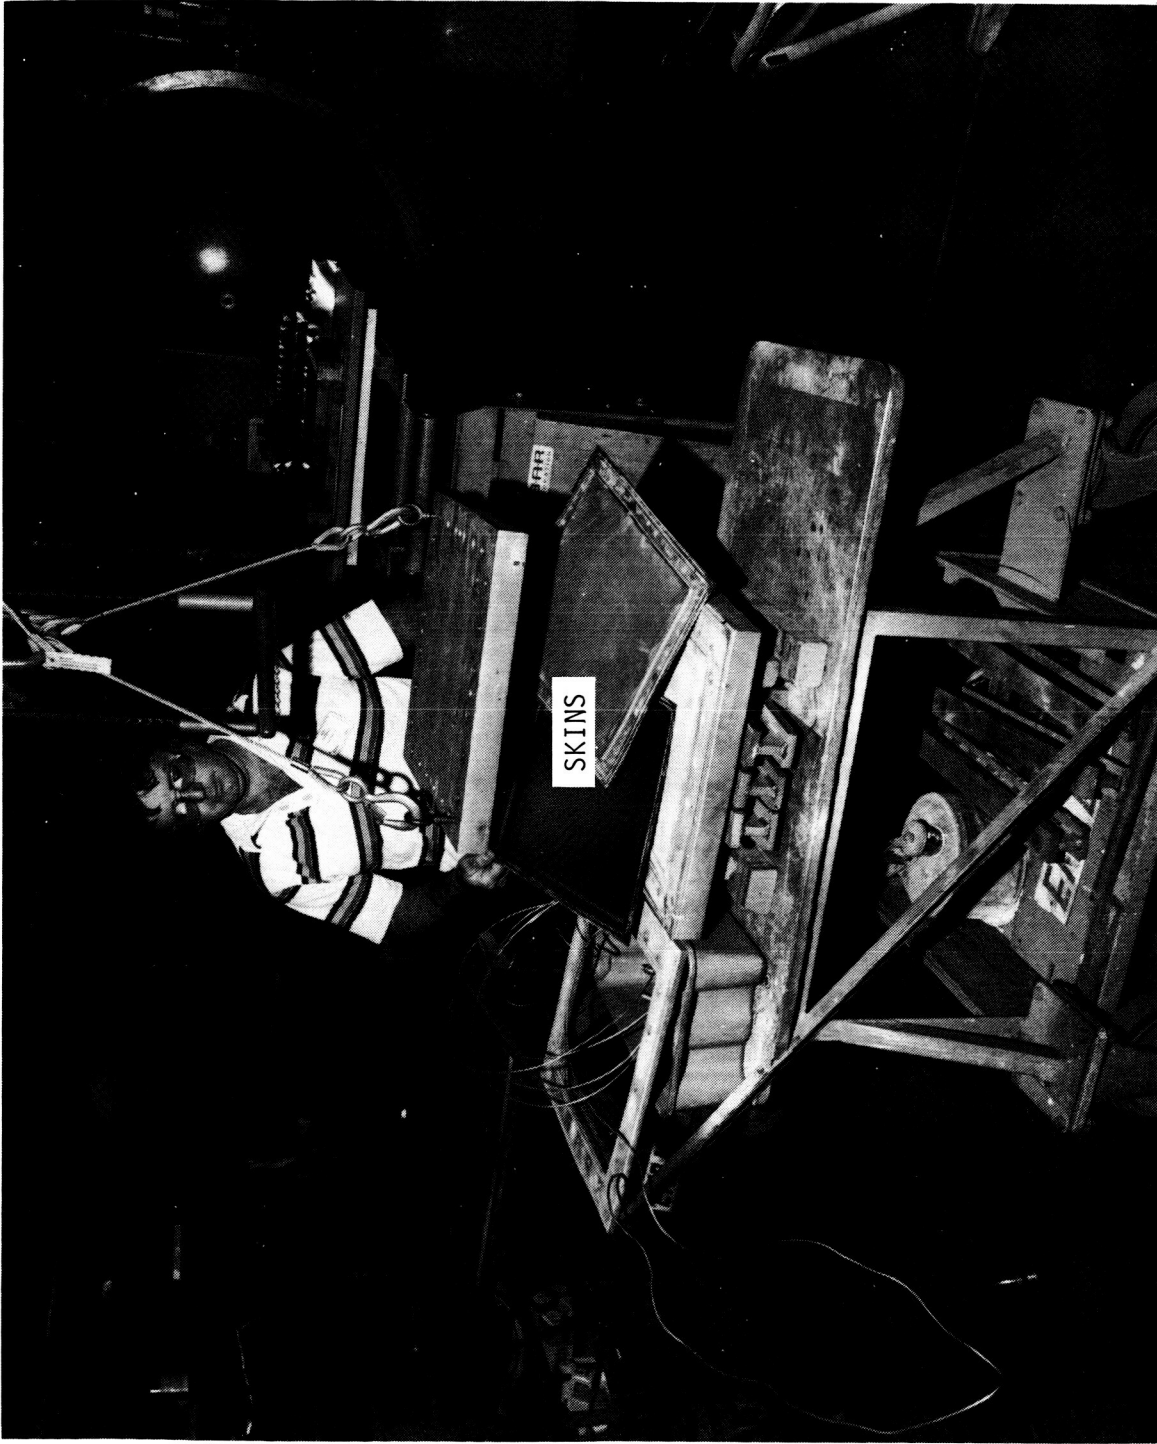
Tool Proof Parts (Un-Trimmed Titanium Skins) Being Removed from SPF Tool
